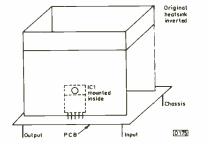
Alternative arrangement using the original heatsink mounted upside down on the PCB.
